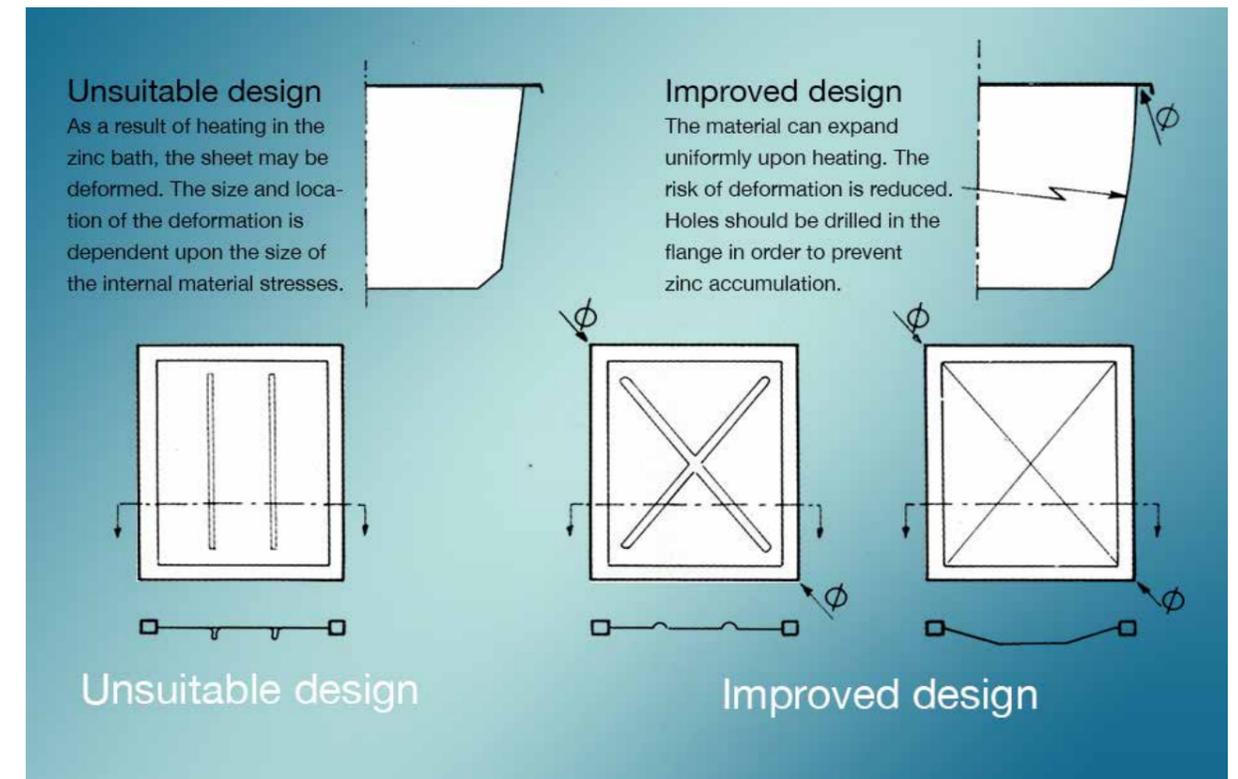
Examples of stiffening of sheet surfaces to prevent distortions.
